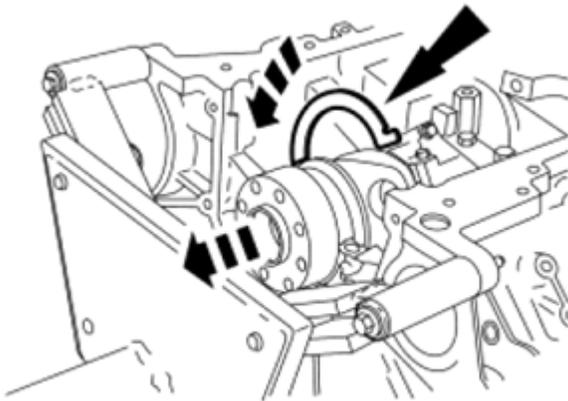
Locating Crankshaft On Upper Crankshaft Main Bearings
